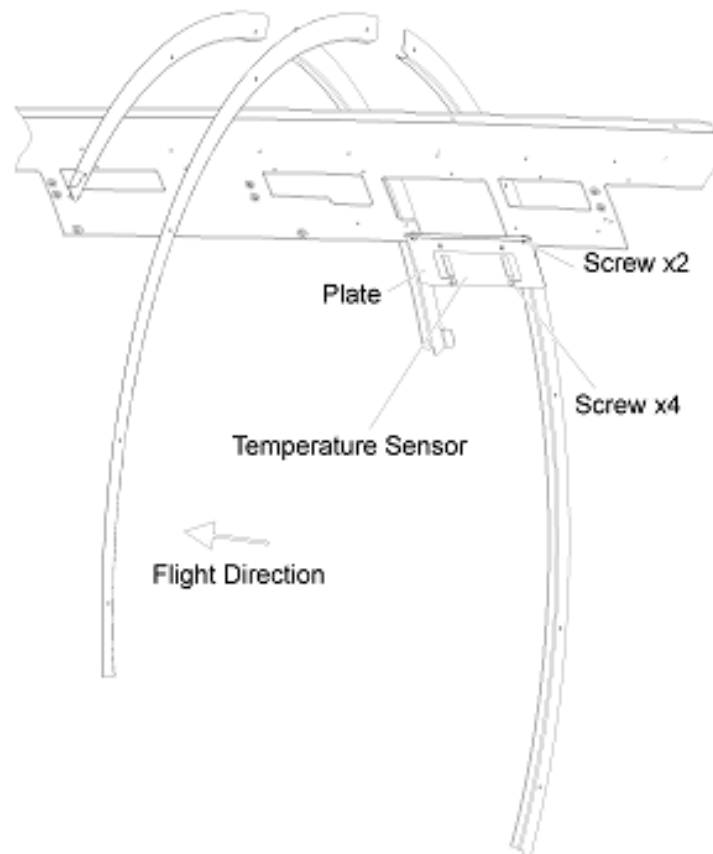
Temperature Sensor Support (Ferry Flight Configuration) - Removal
